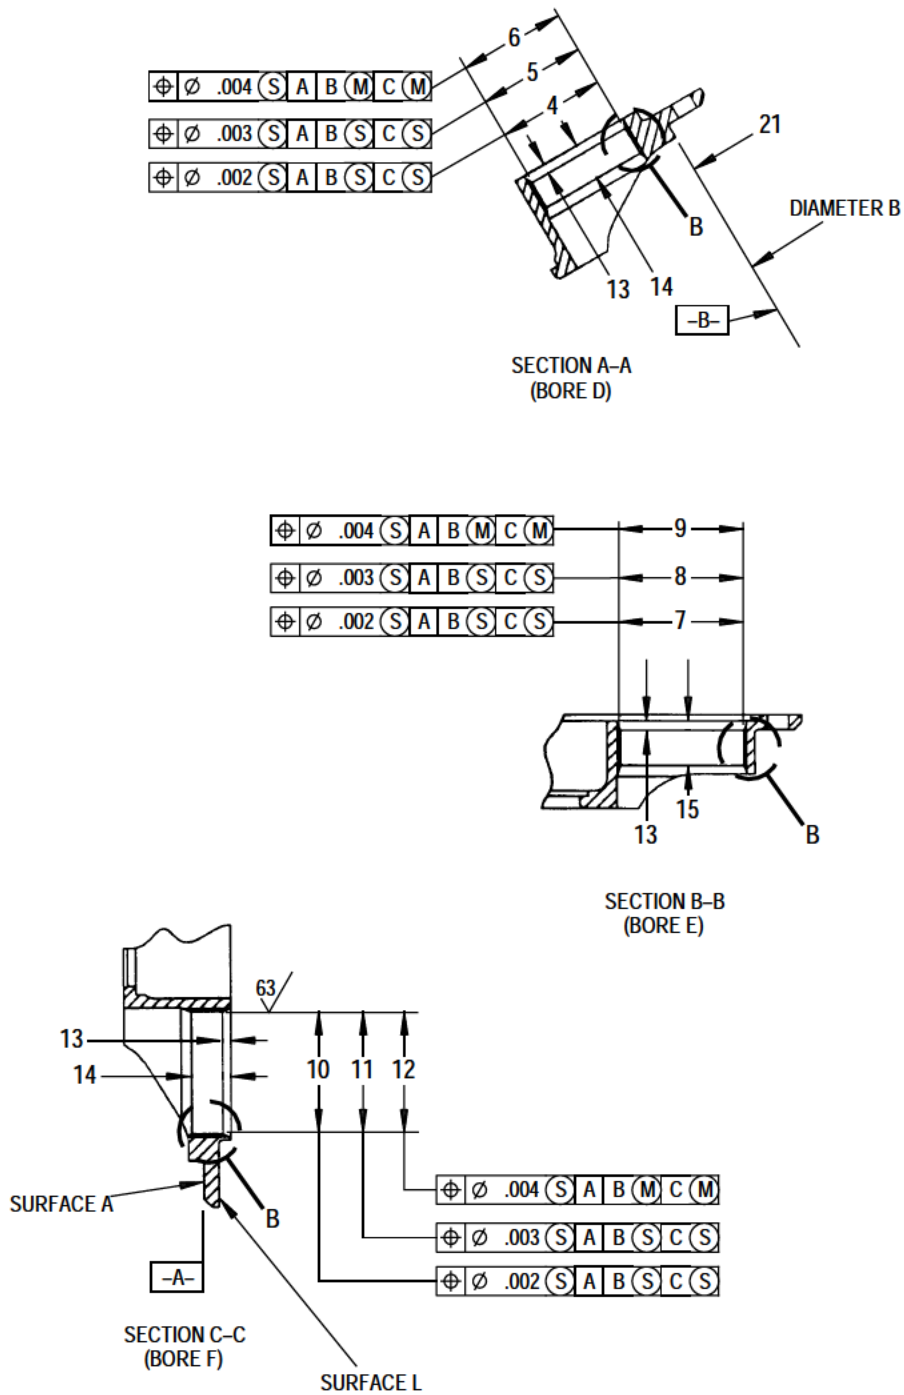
No. 4 Bearing Front Air Sealing Flange Metal Seal Ring Contact Surface - Plasma Spray Repair
